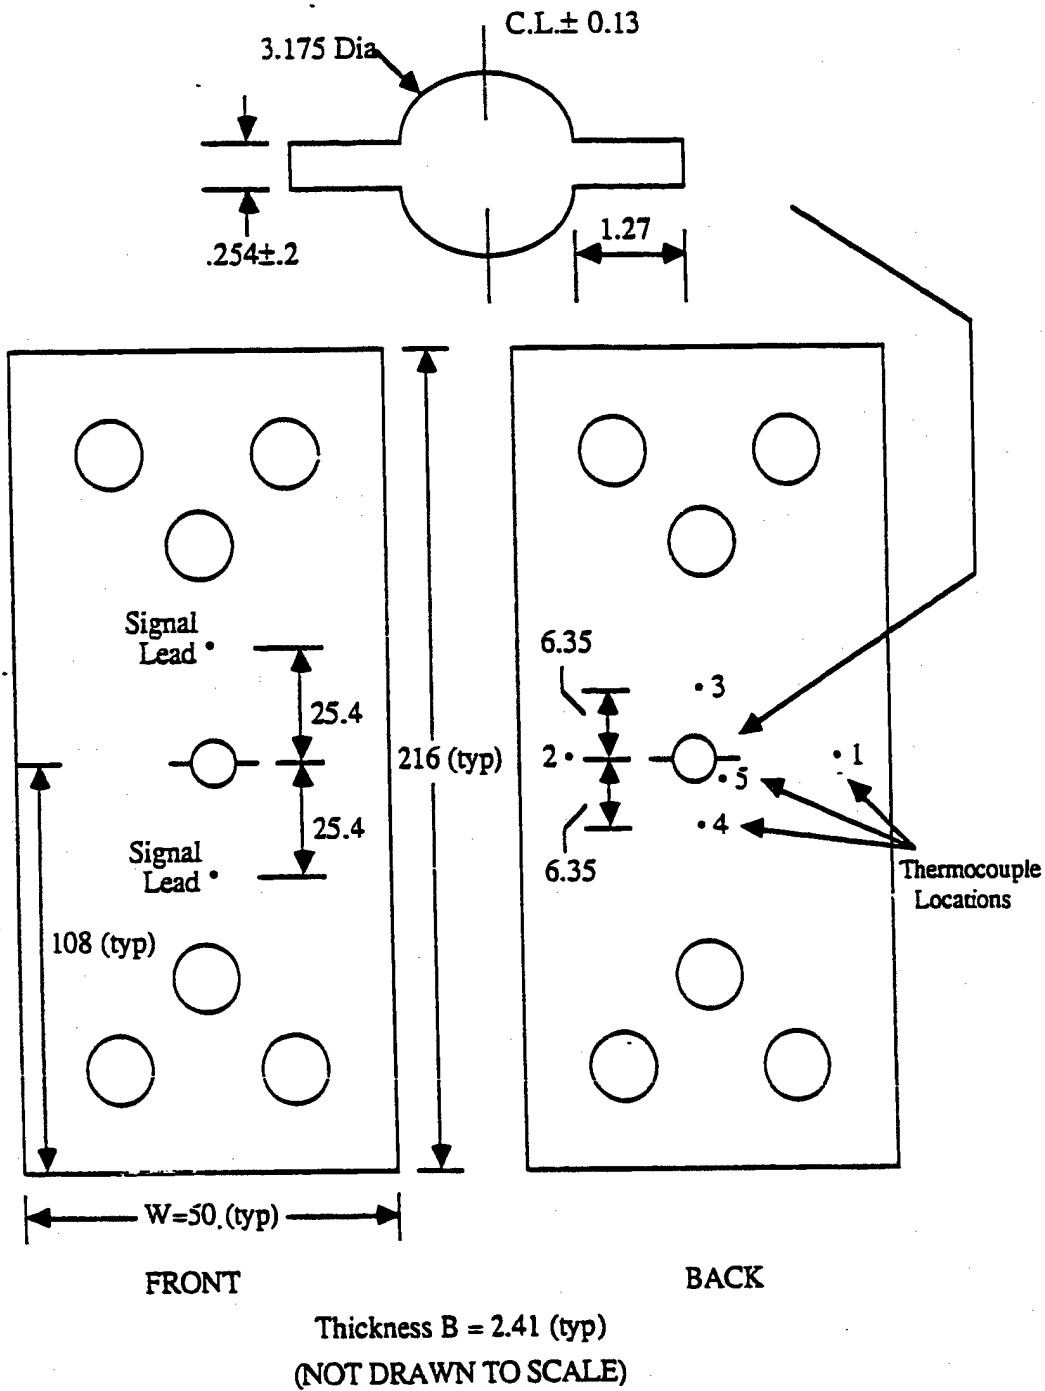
Specimen Geometry (all dimensions in millimeters)
